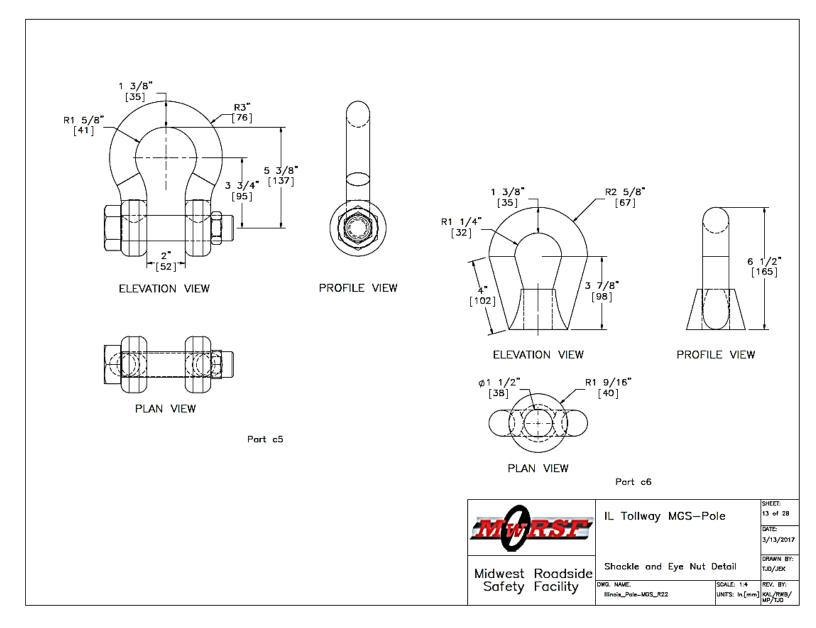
Shackle and Eye Nut Detail, Test No. ILT-1
